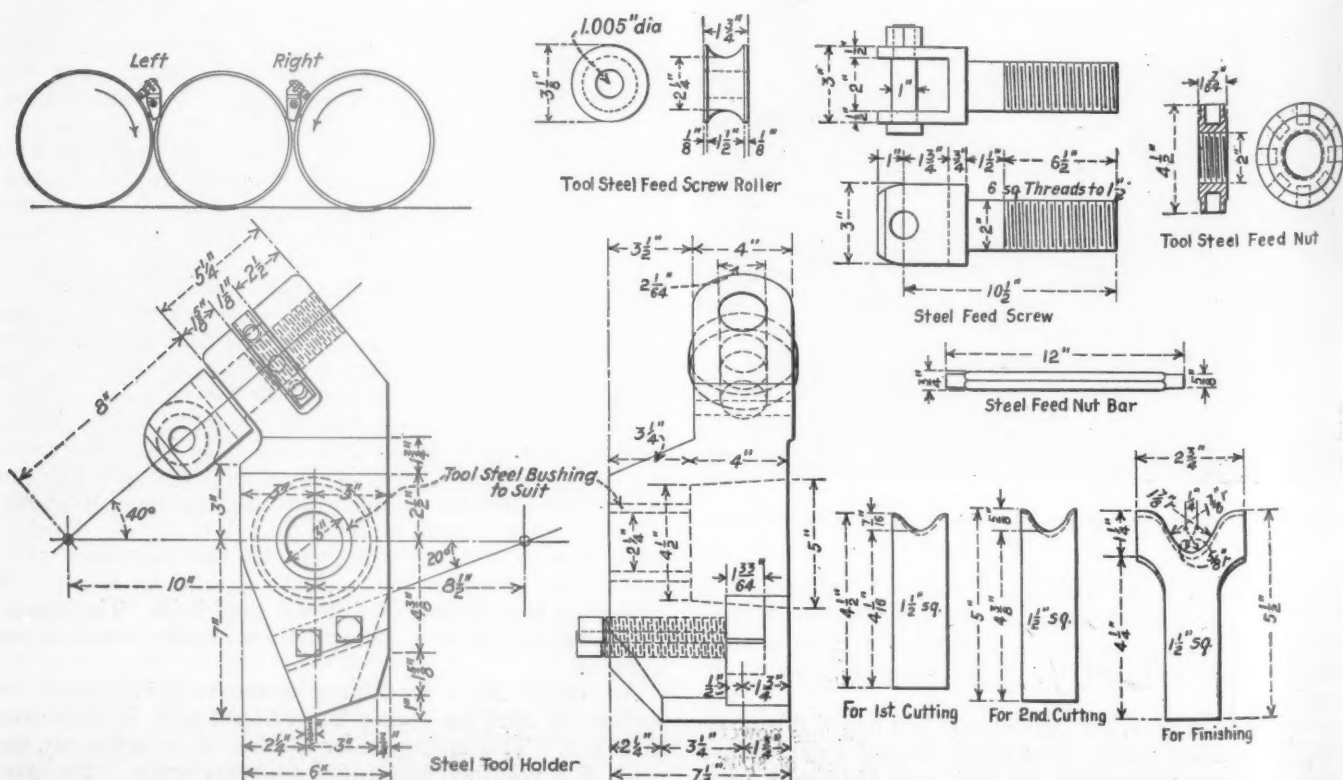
Portable Tire-Turning Tool for Cutting Down Flanges to the Proper Height without Unwheeling Locomotives
